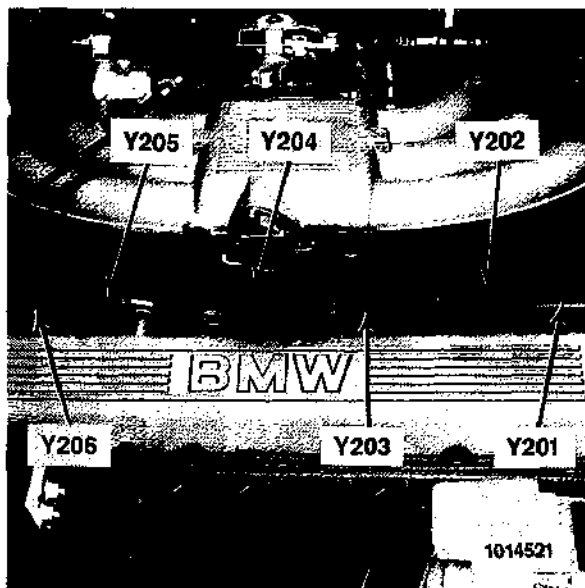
Top Of Engine (M20 Engine Shown; M30 Engine Similar)
